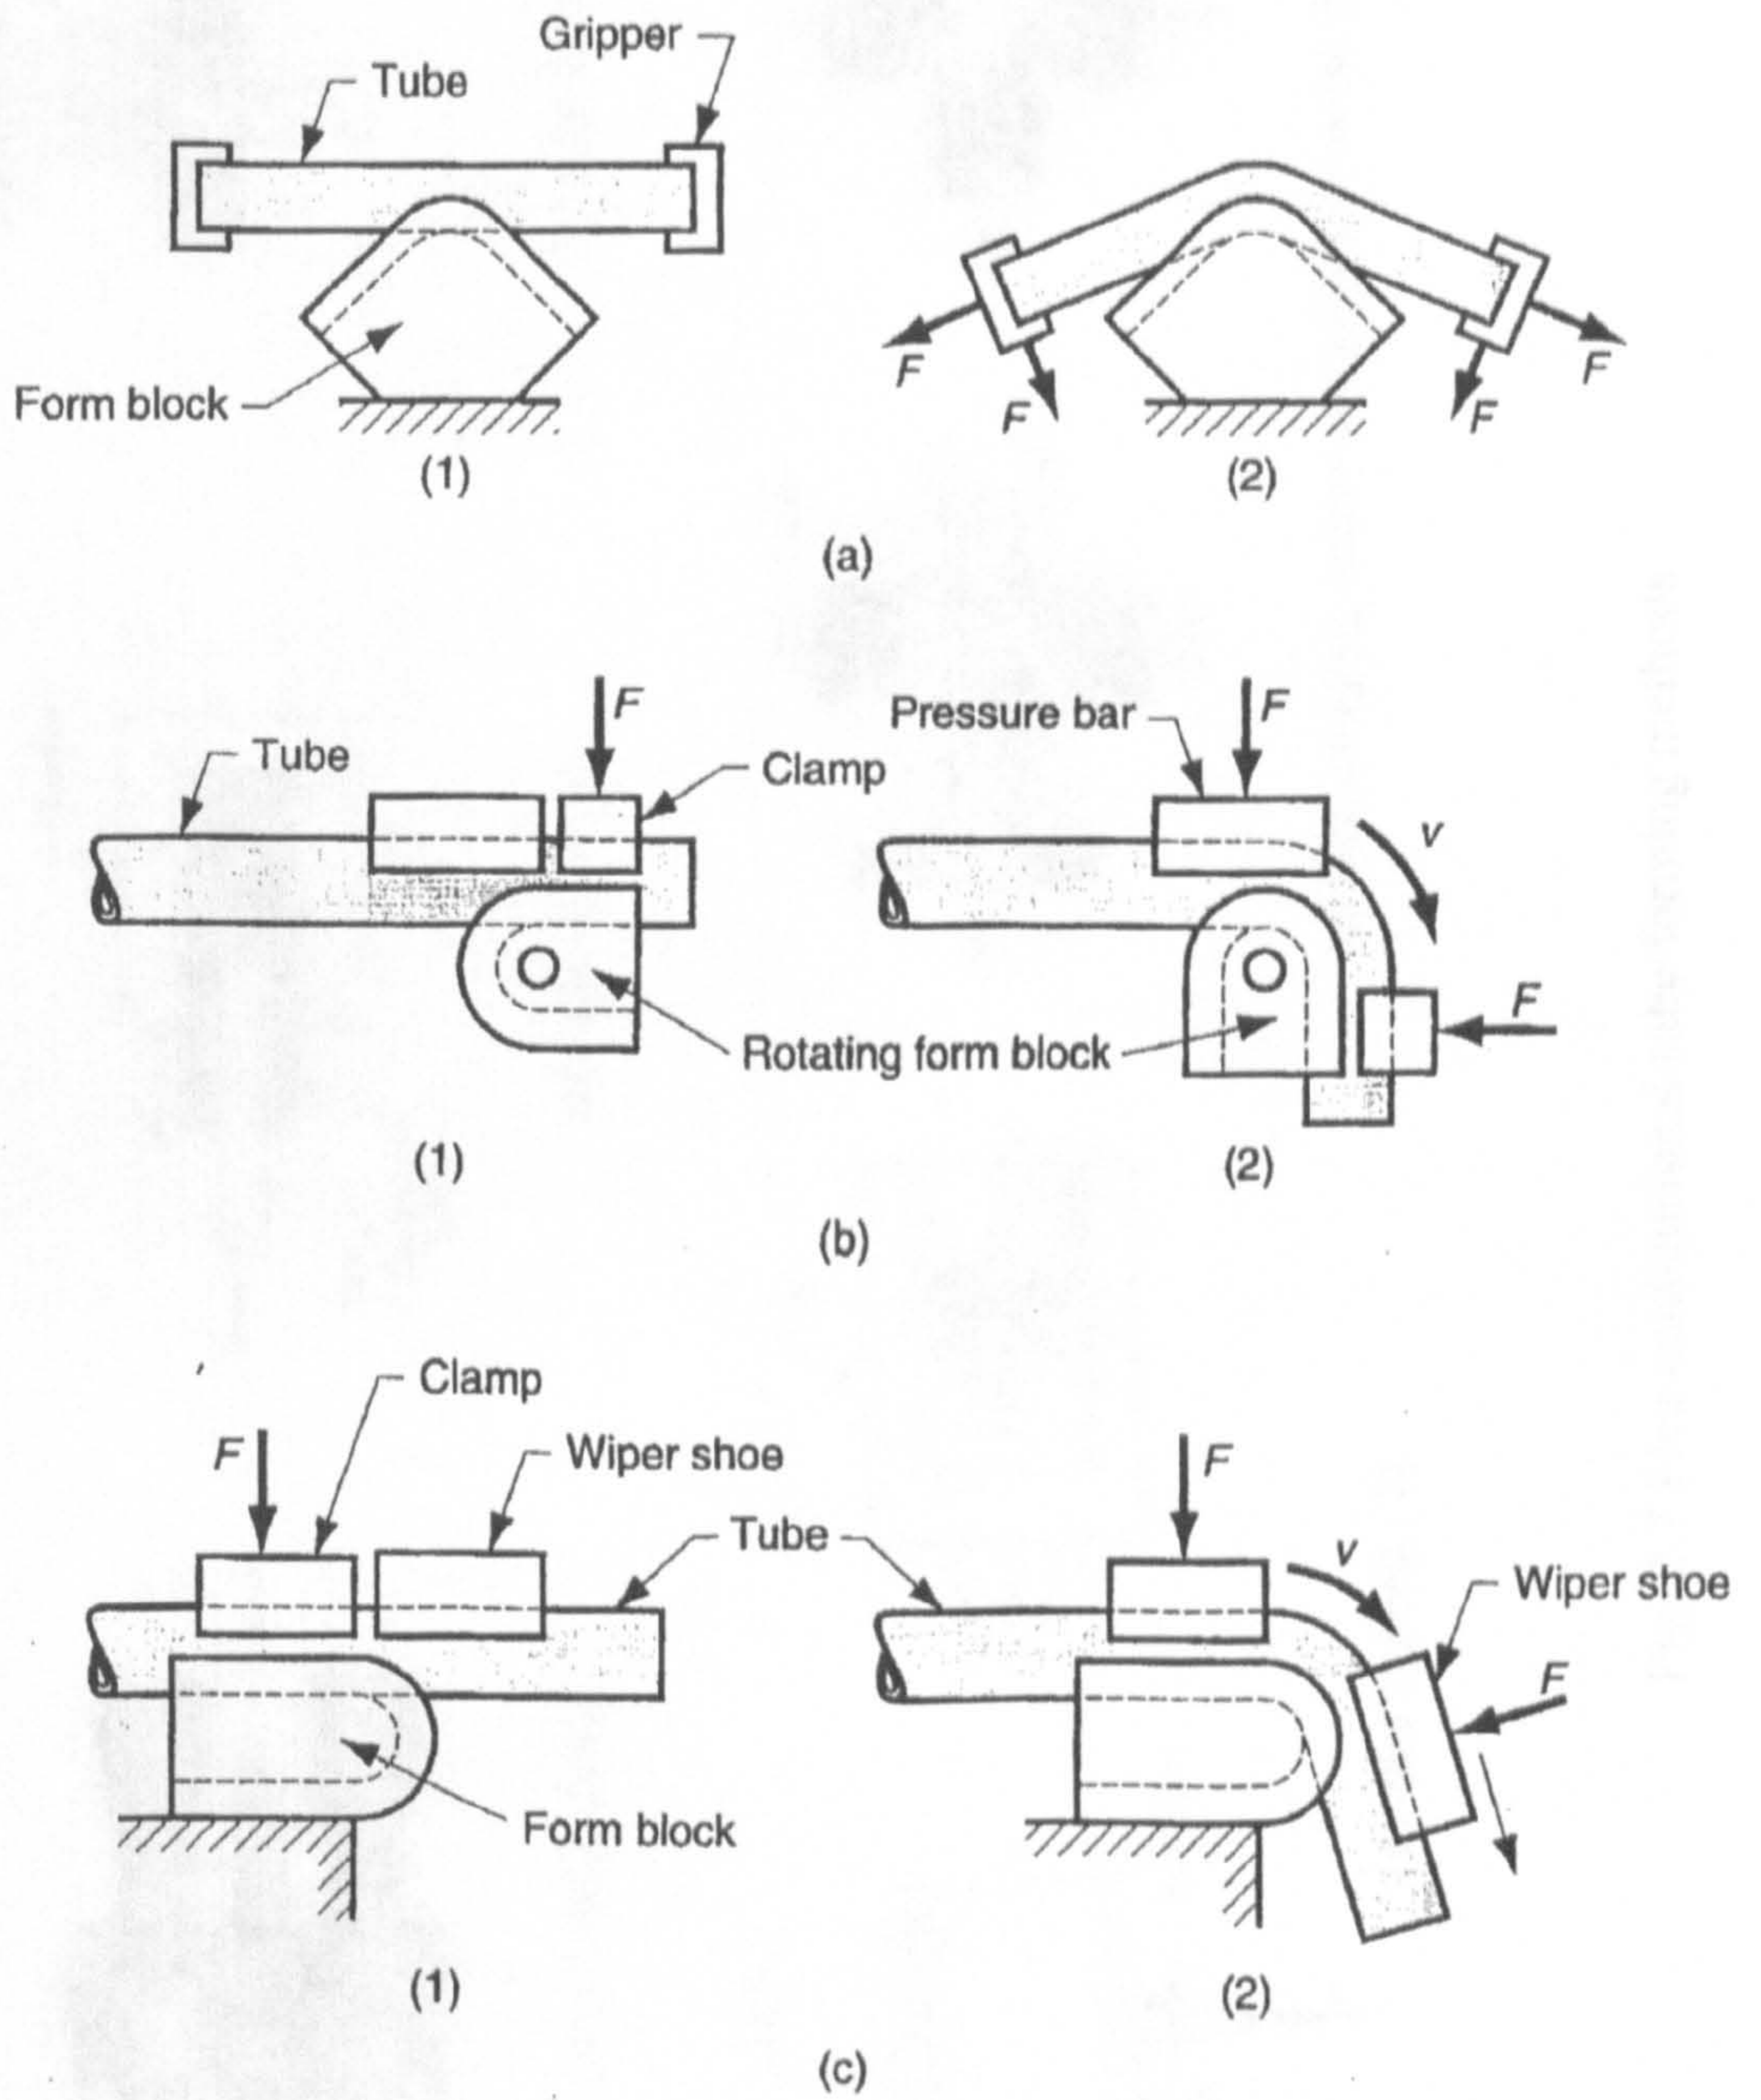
Three tube bending methods: (a) stretch bending; (b) draw bending and (c) compression bending [2]
